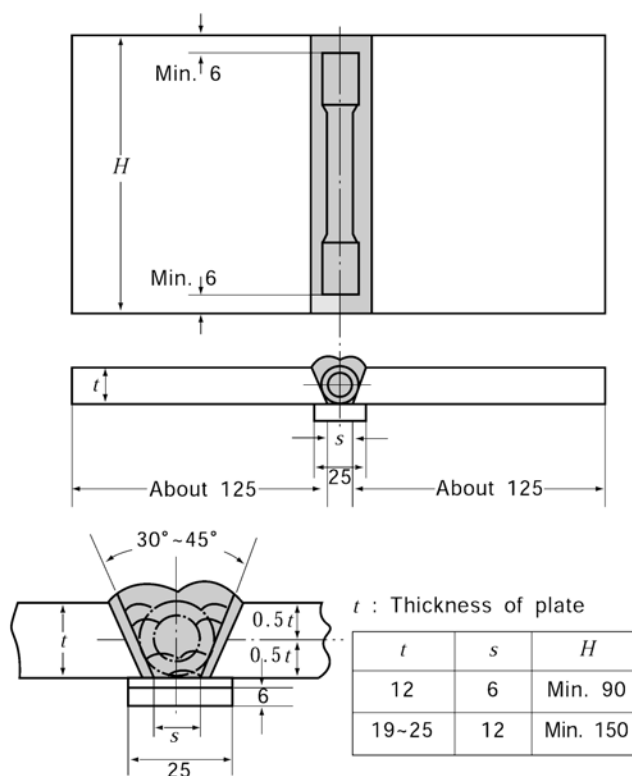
Deposited Metal Test Assembly for Stainless Steel (Unit : mm)
